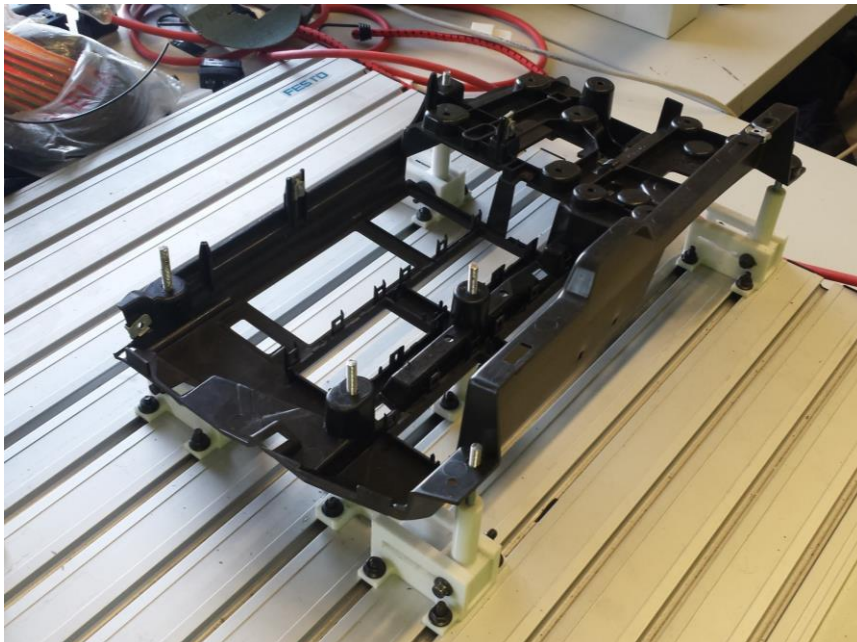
The complete fixture system holding the HMI-panel. Note the threaded rods that hold the panel in place.
